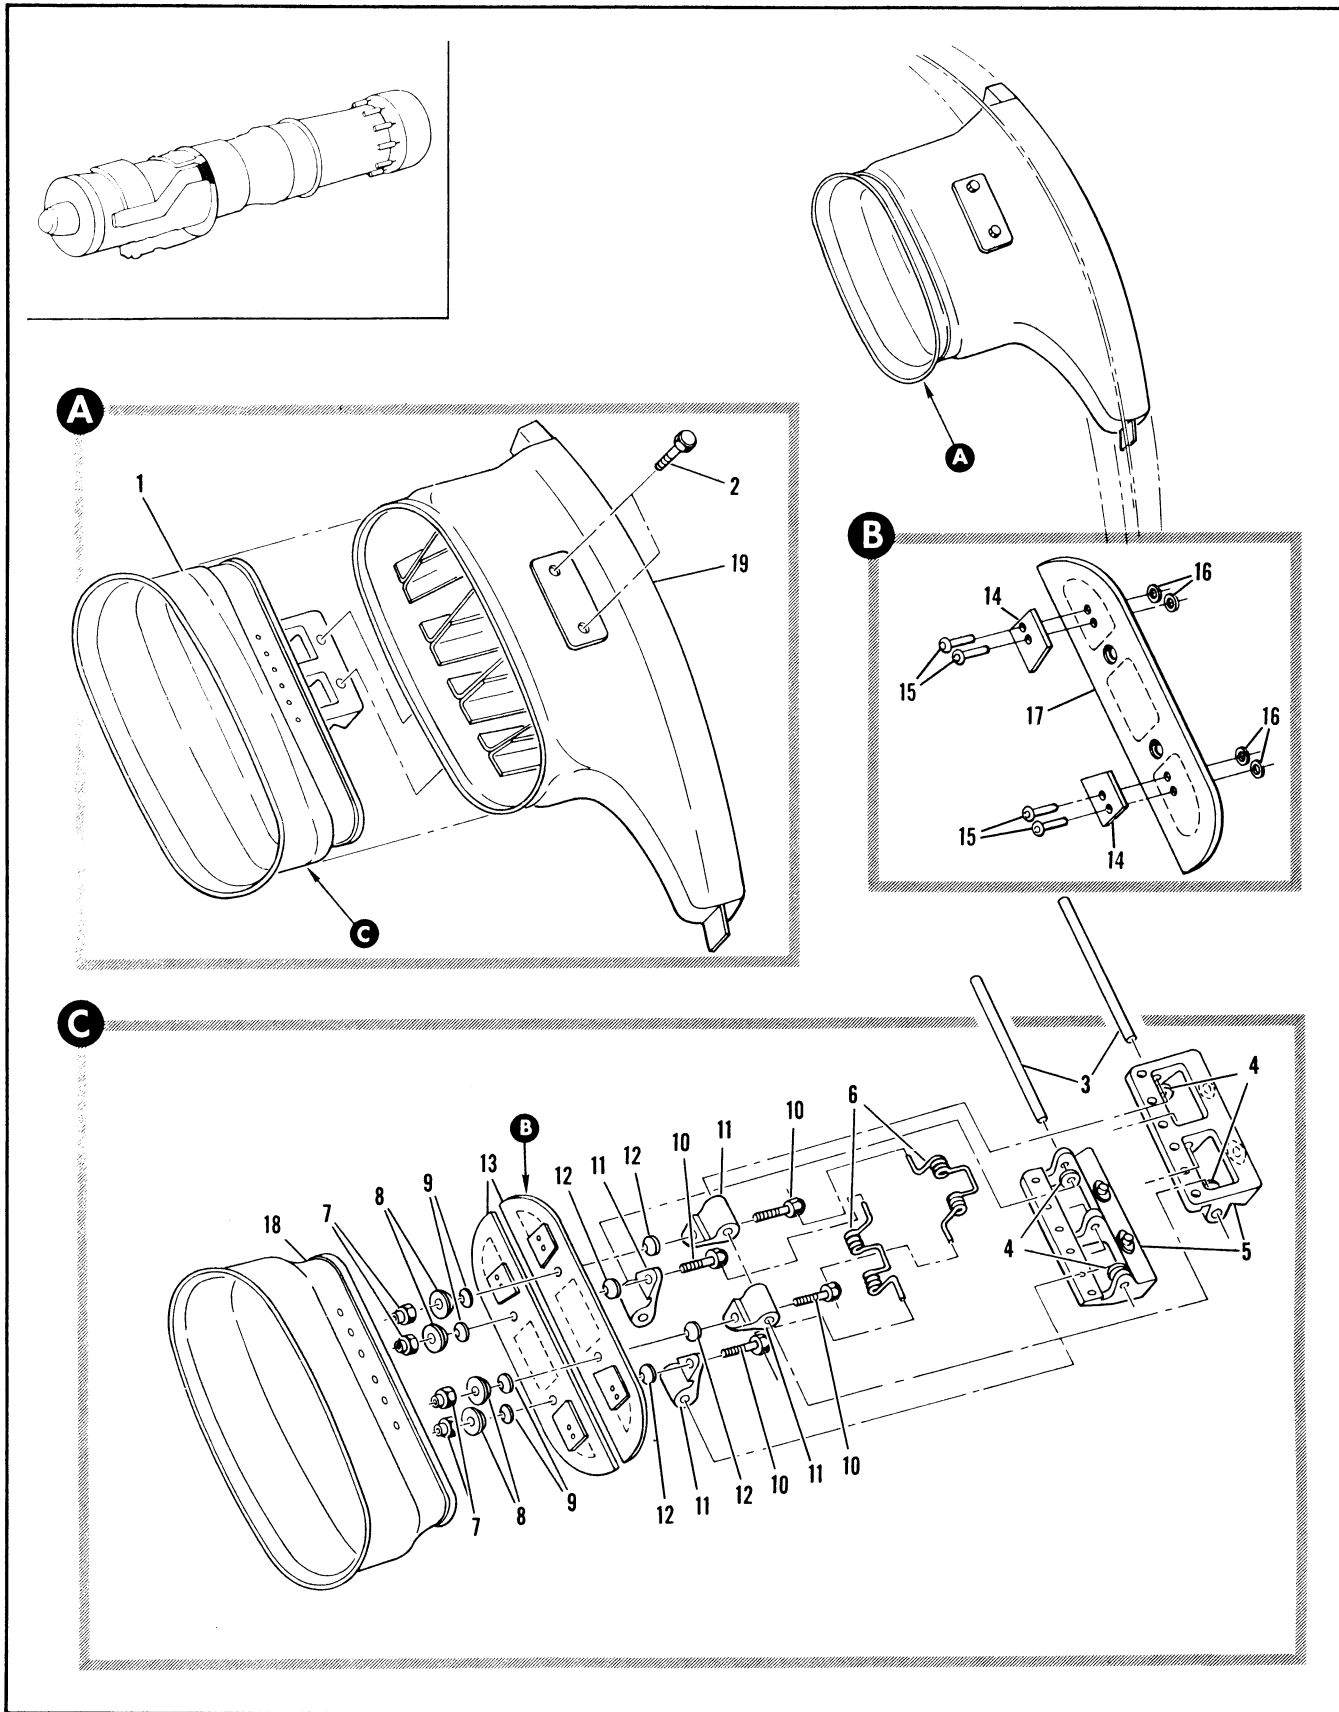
Ram Air Shroud Cooling Check Valve Assembly
